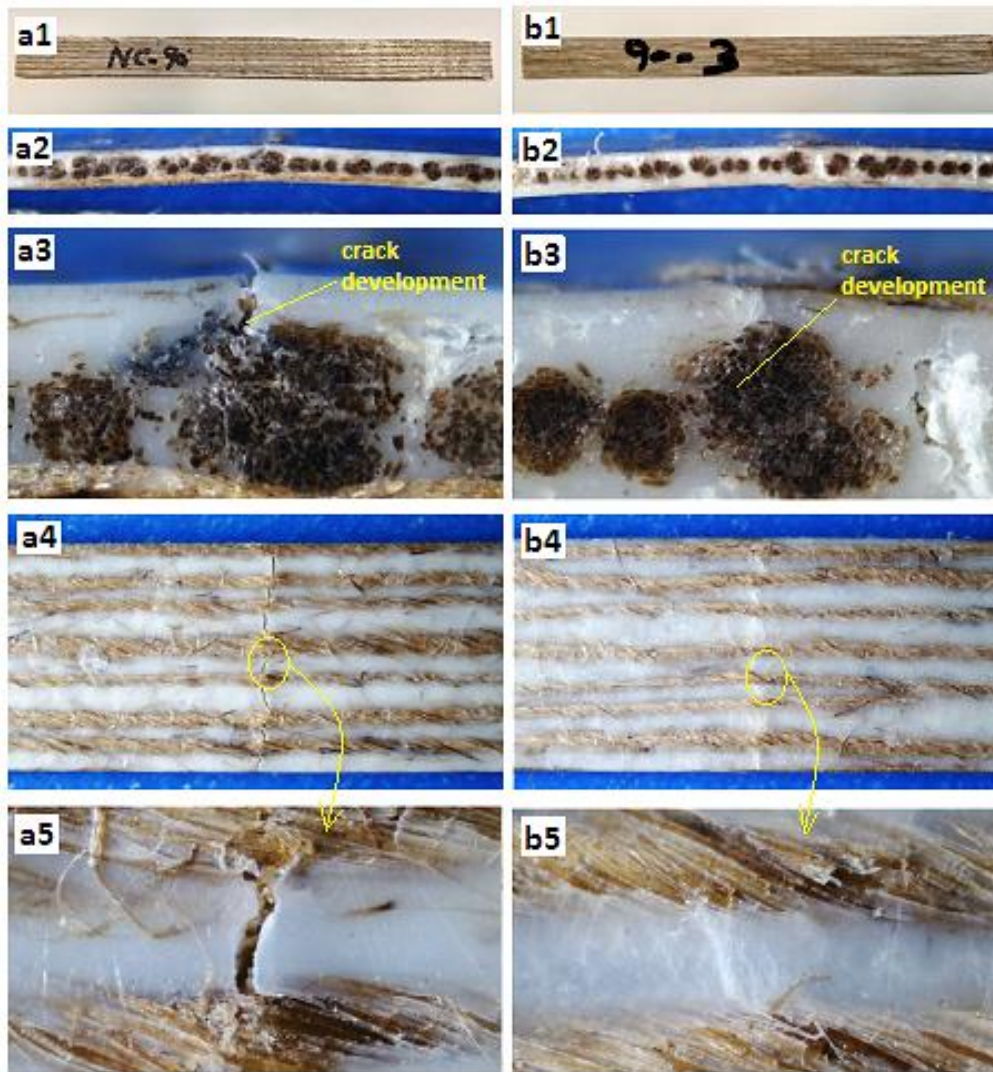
Tested samples of non-broken 3-point bending, (a1, b1) non-commingled and commingled specimens before test, (a2, b2) side view of tested specimens, (a3, b3) side zoomed in view of tested specimens with crack propagation, (a4, b4) tension sides of the specimens (a5, b5) tension side with zoomed view
